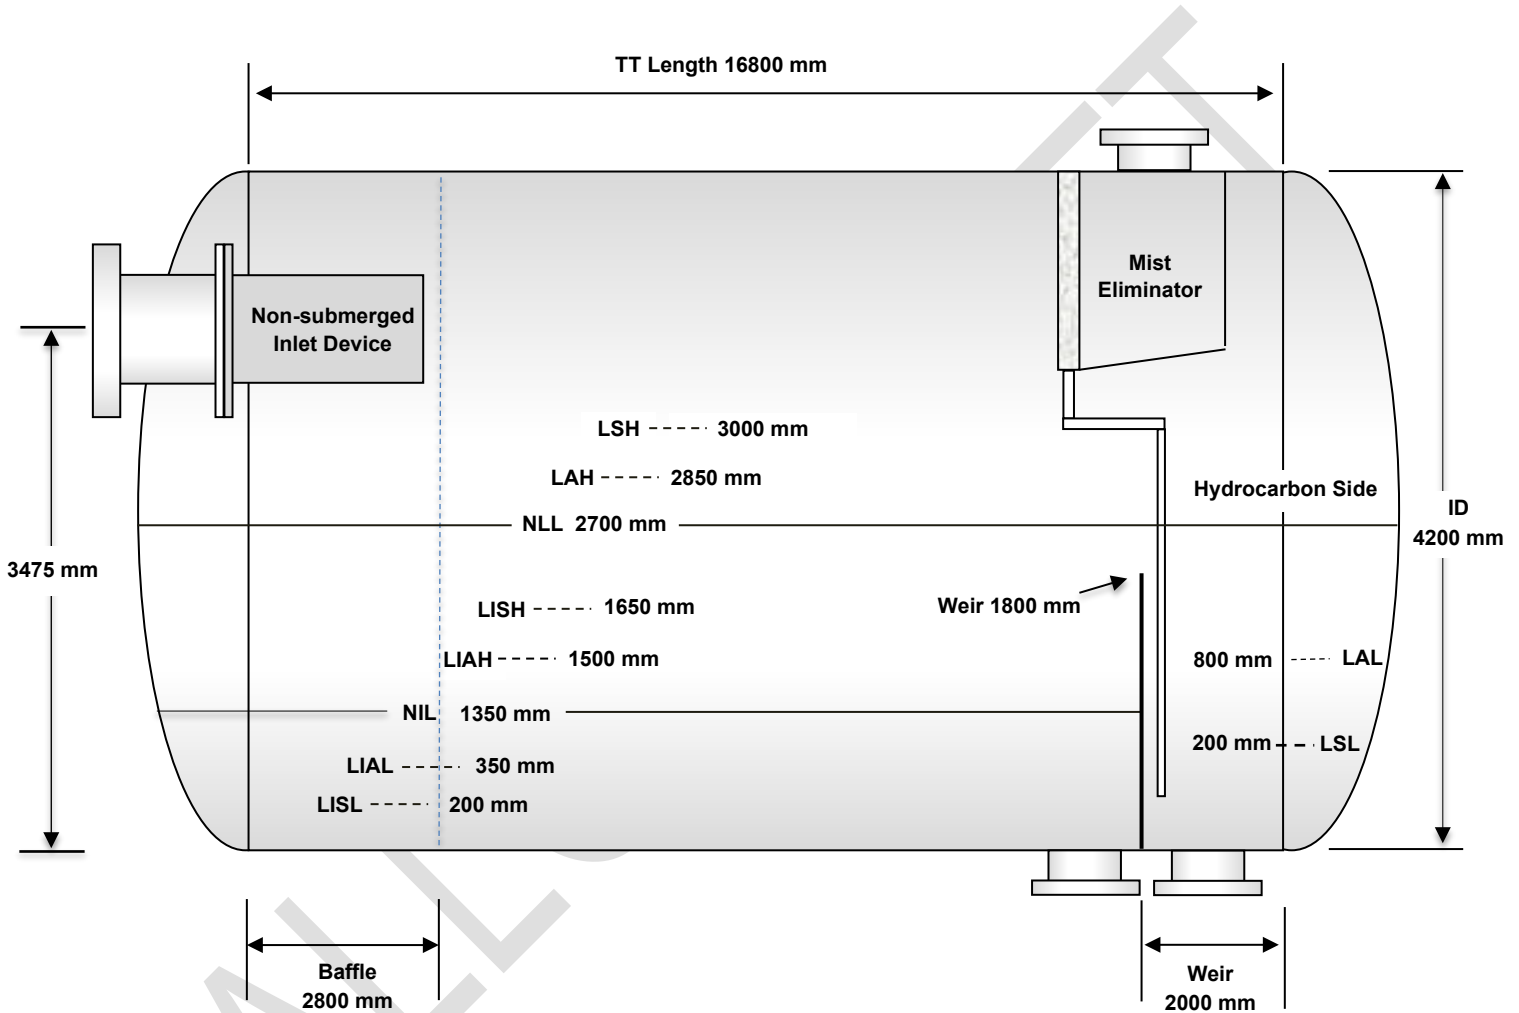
Example 3 horizontal separator (flooded weir) dimensions
